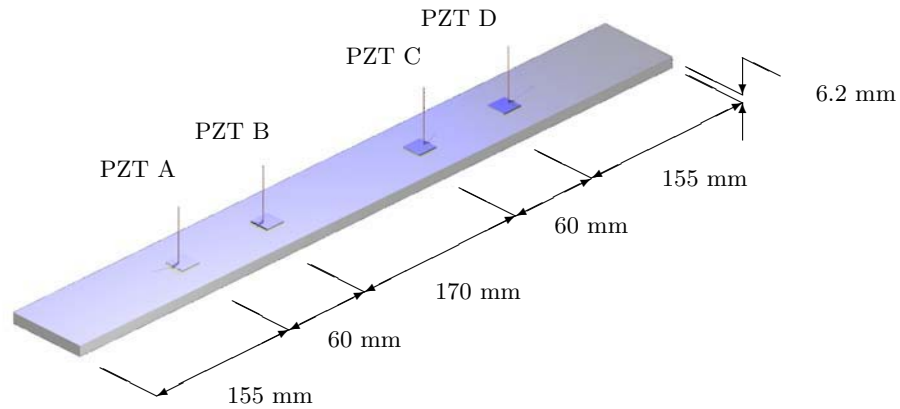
Schematic of unpatched aluminium coupon showing location of surface mounted piezoelectric elements.
